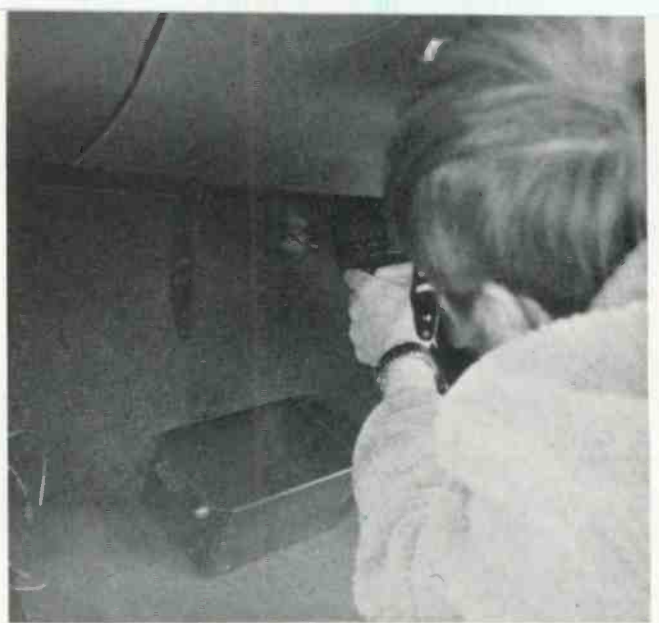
Burning holes in carpeting for locating position of future power supply bolts.
